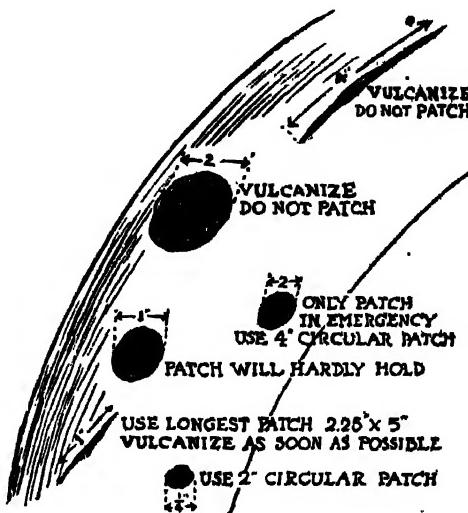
View of Inner Tube, Showing the Various Sized Holes and Sizes of Patch to Use in Making Repairs, also Defects that Cannot be Patched but Must be Vulcanized.
